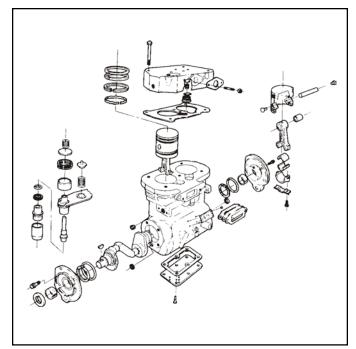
TU-FLO® 501 AIR COMPRESSOR (THRU DRIVE) EXPLODED VIEW
